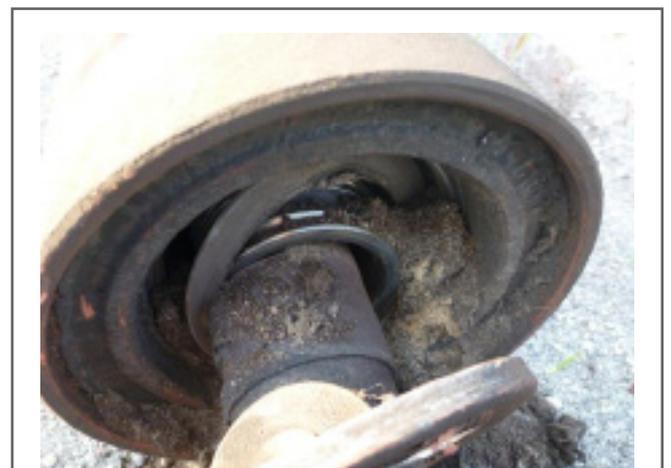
Consequential damage to a support roller from manufacturer A in the form of a completely destroyed rolling bearing, the inner ring has already worked its way several millimetres into the support roller axle [1]
